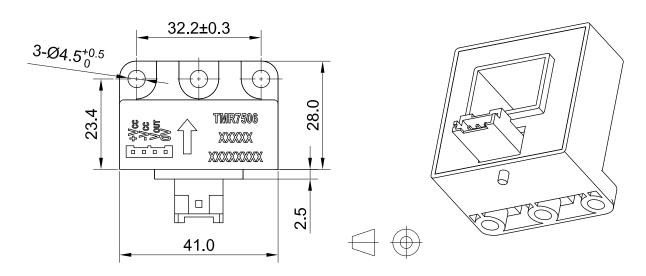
Sensor outline (unit: mm, tolerances for unmarked scales ±1 mm)
